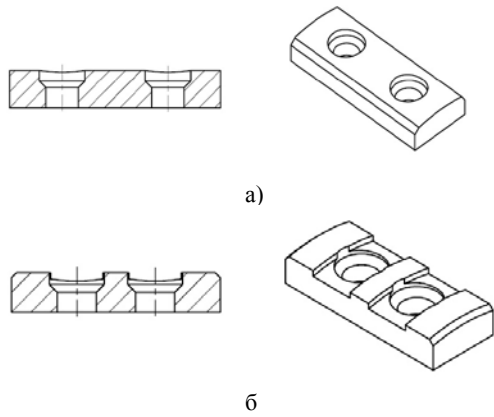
Guiding elements of the analyzed instruments constructions a – smooth guiding plate; b – intermittent guiding plate
